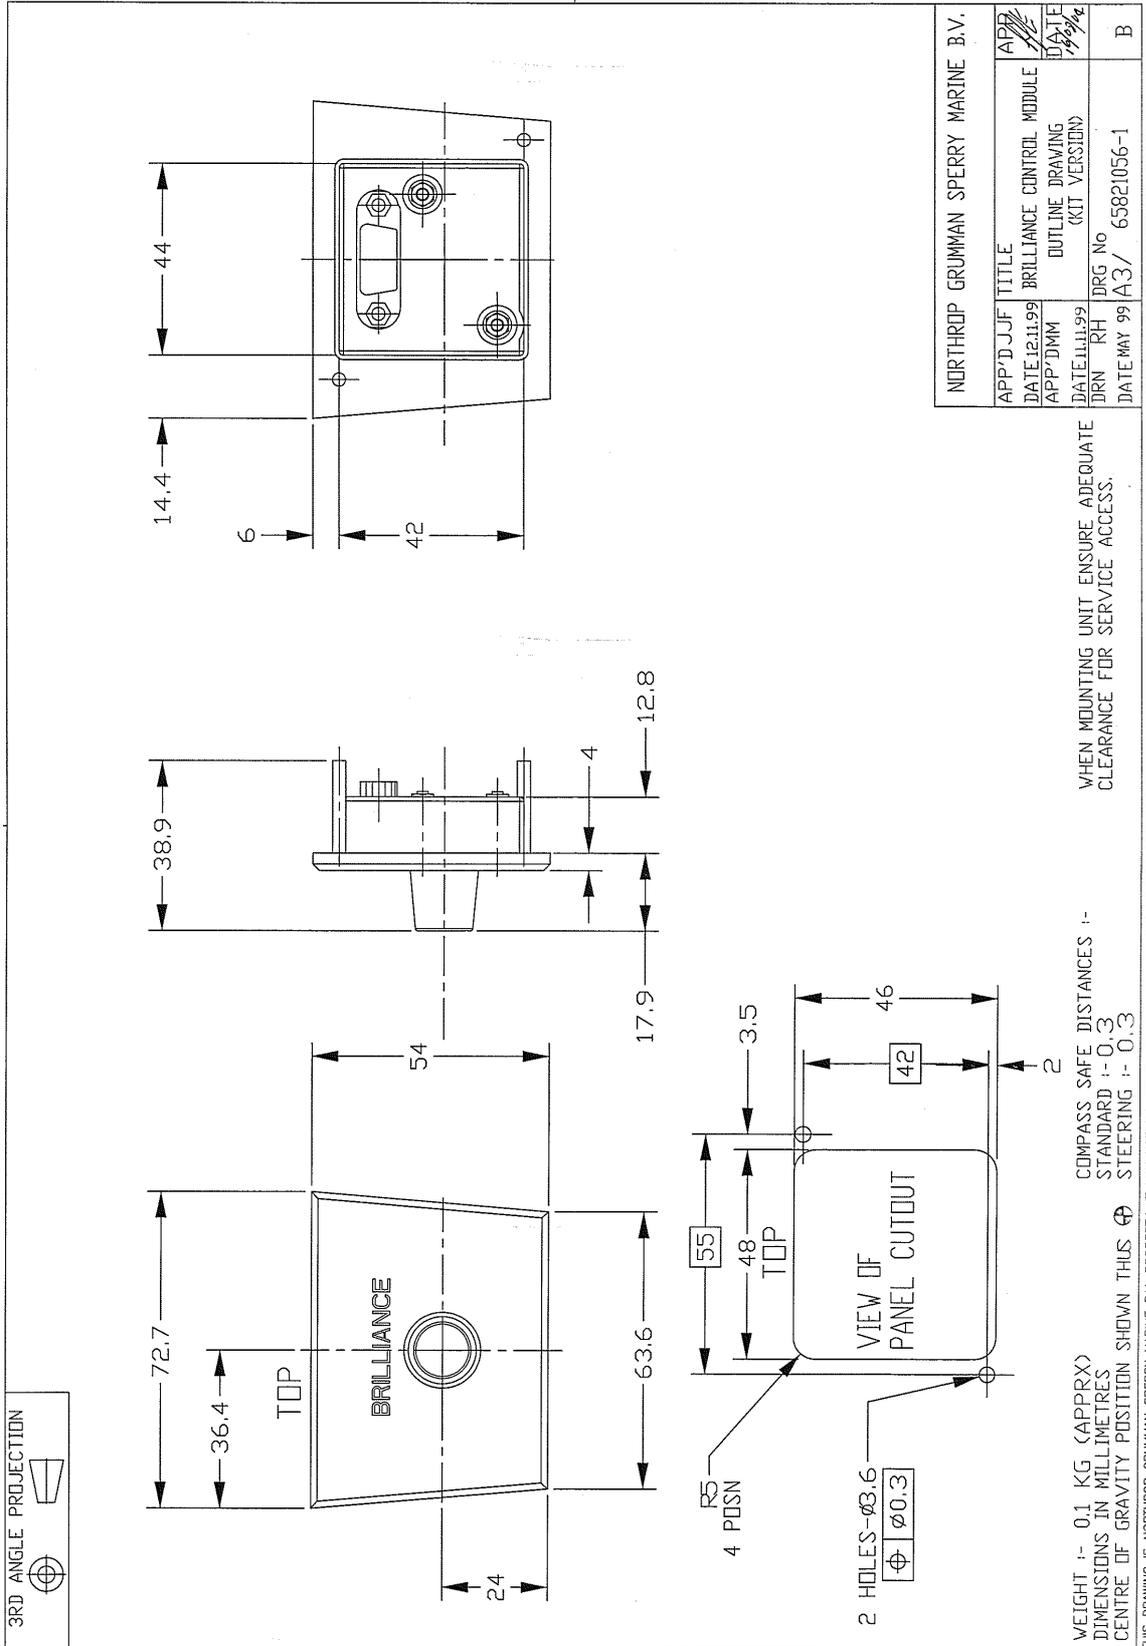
Brilliance Control Module Outline Drawing (73mm version)
